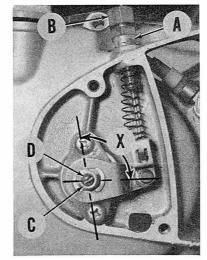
Turn cable adjuster (B) to obtain 90-100 degree angle (X). Refer to text for adjustment of screw (D).
